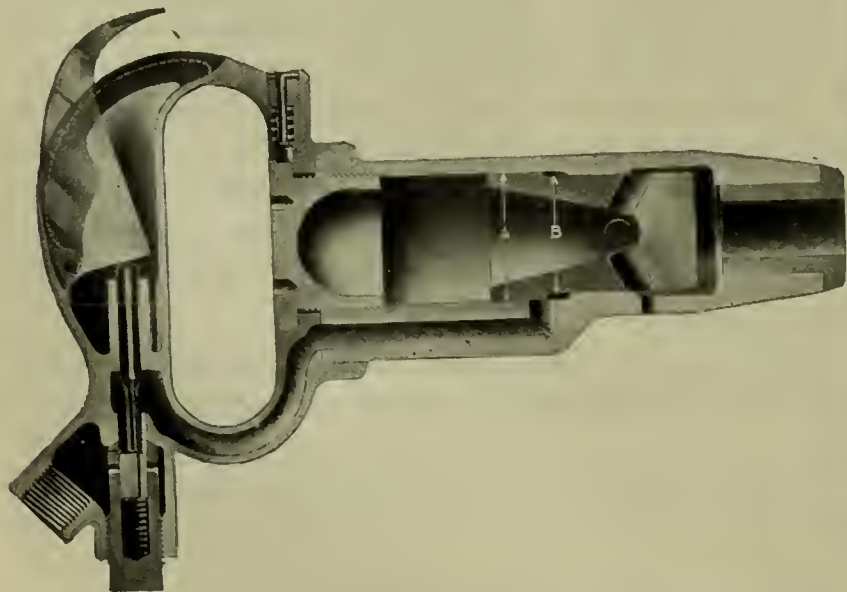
PNEUMATIC HAMMER MANUFACTURED BY THE Q. & C. Co.
